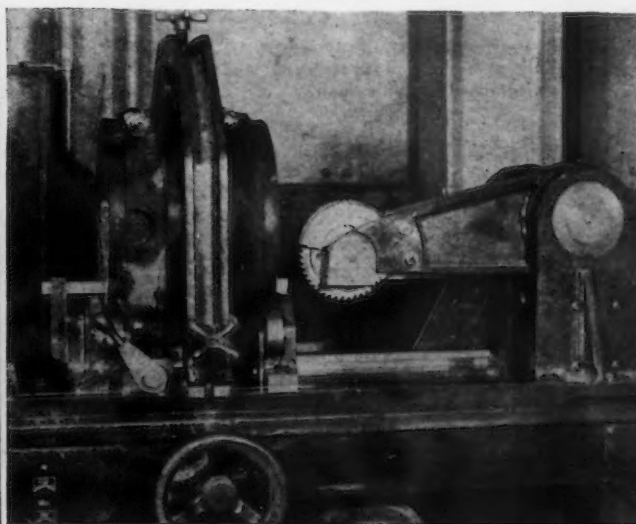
Bearing clamped in fixture ready to be fed into saw by handwheel. Bar guide for lining up split in casting may be seen in place.
